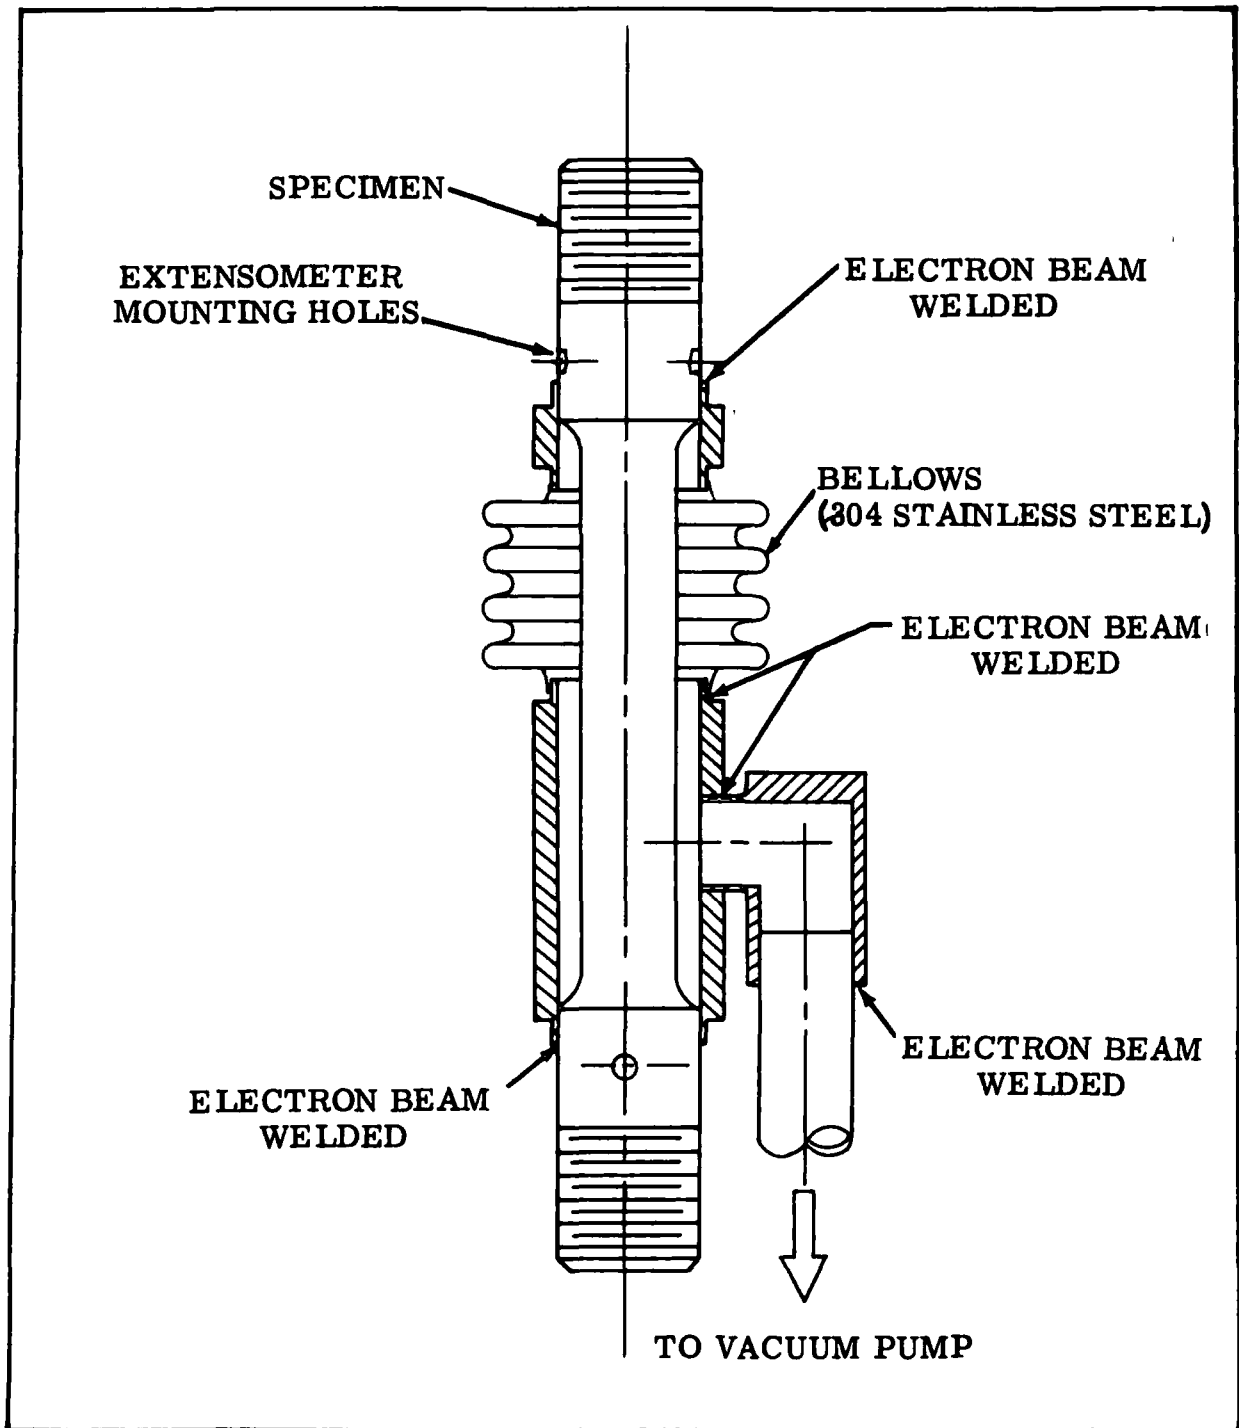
Encapsulated Vacuum Creep Specimen
